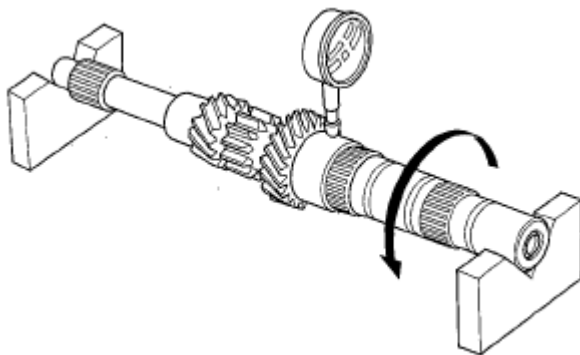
Inspecting Runout With Supporting Ends Of Mainshaft
